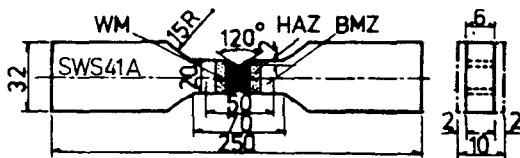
Shape of groove and welding sequence(mm).
